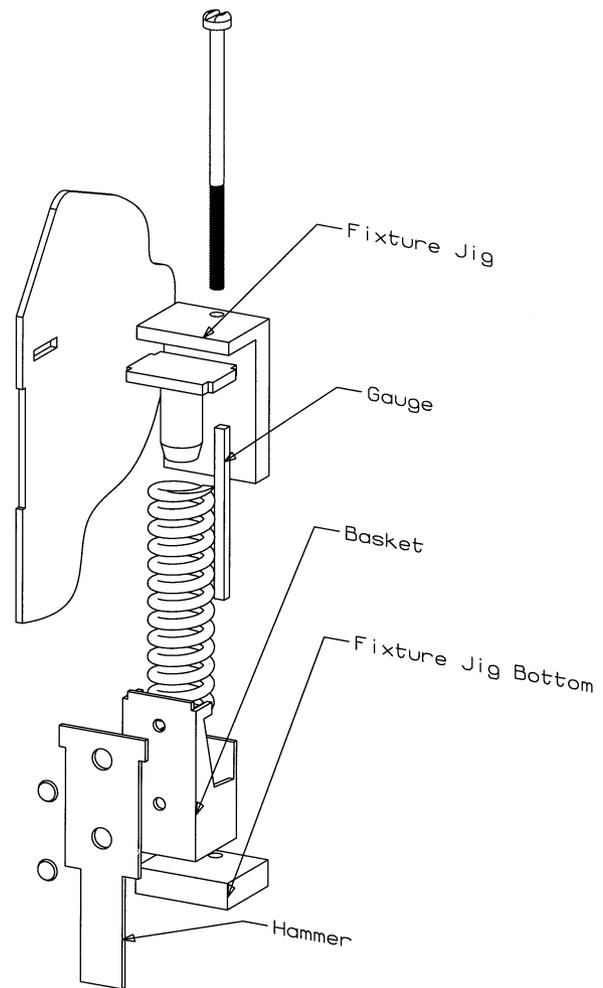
An exploded view of the spring assembly with design changes to allow for tuning.
